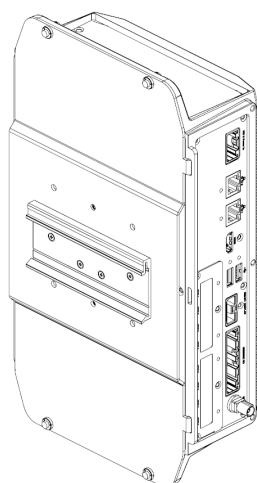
TREK-60 Wall and DIN Rail Mounting
